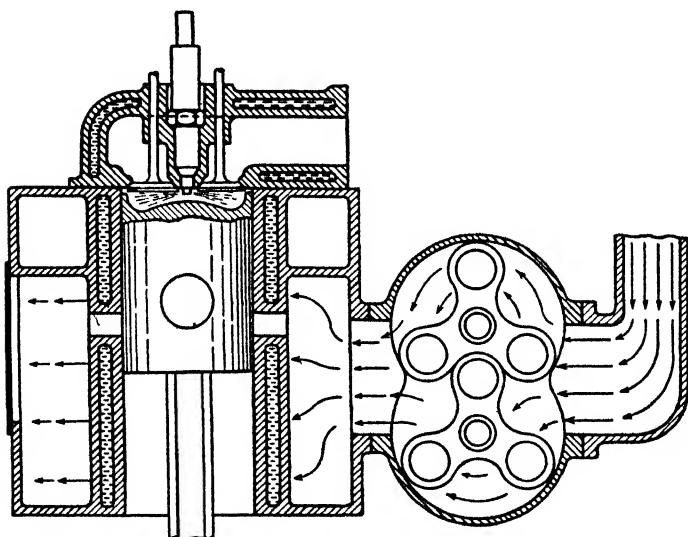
FUEL INJECTION IN TWO-STROKE ENGINE.
